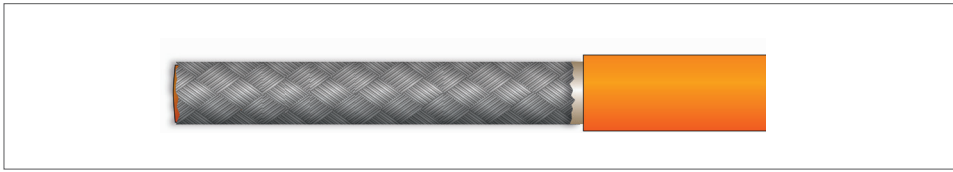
Step 1: Removing outer sheath and protective foil
